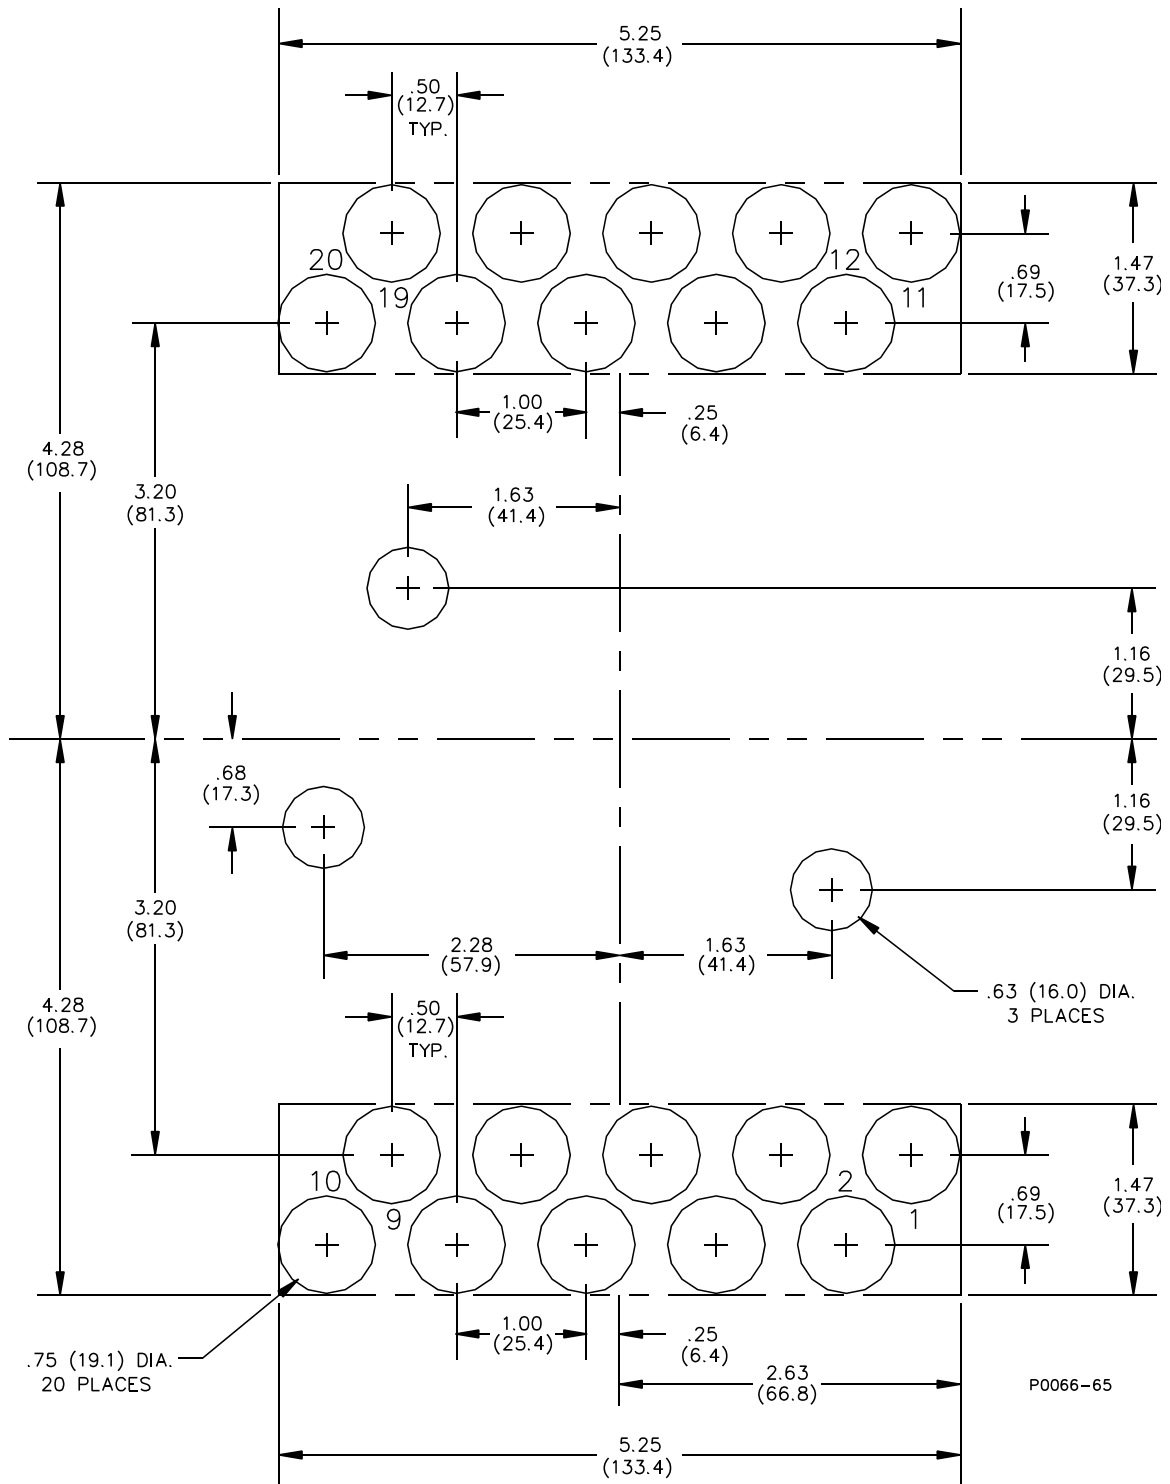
Panel Cutting/Drilling, Double Ended, Projection Mount, S1 Case
